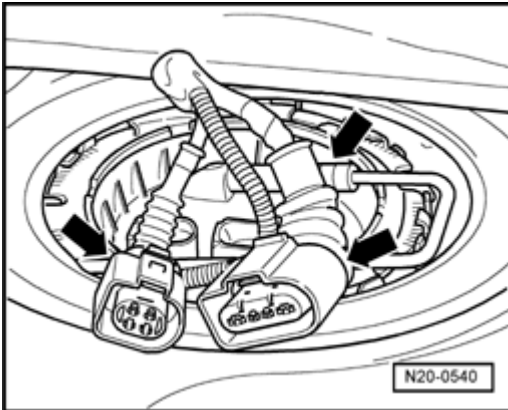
Disconnecting Connectors And Supply Line For Auxiliary Heater From Left Flange
